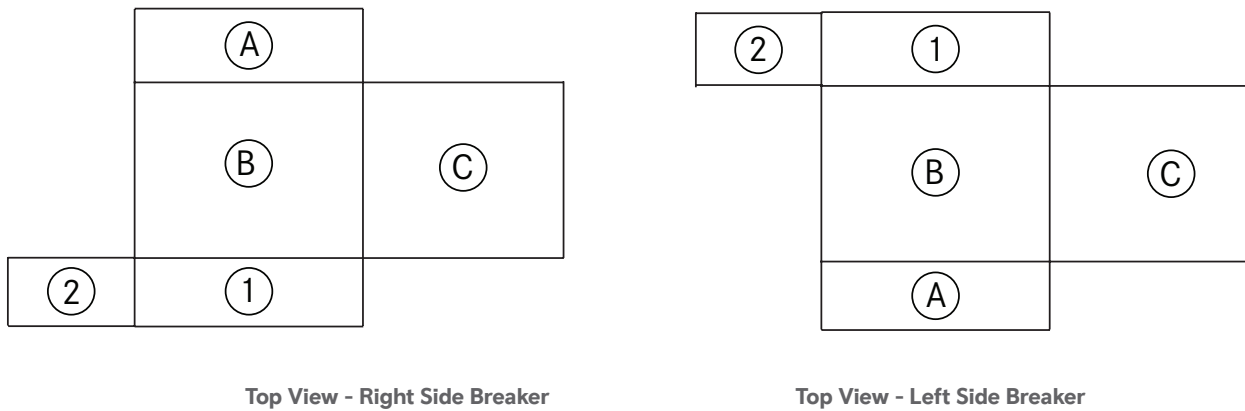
360 Frame Enclosure Breaker Mounting Positions
